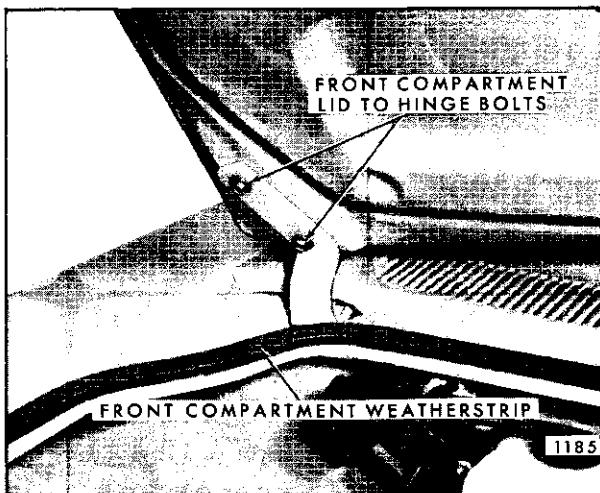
Front Compartment Weatherstrip and Front Compartment Lid Attaching Bolts
